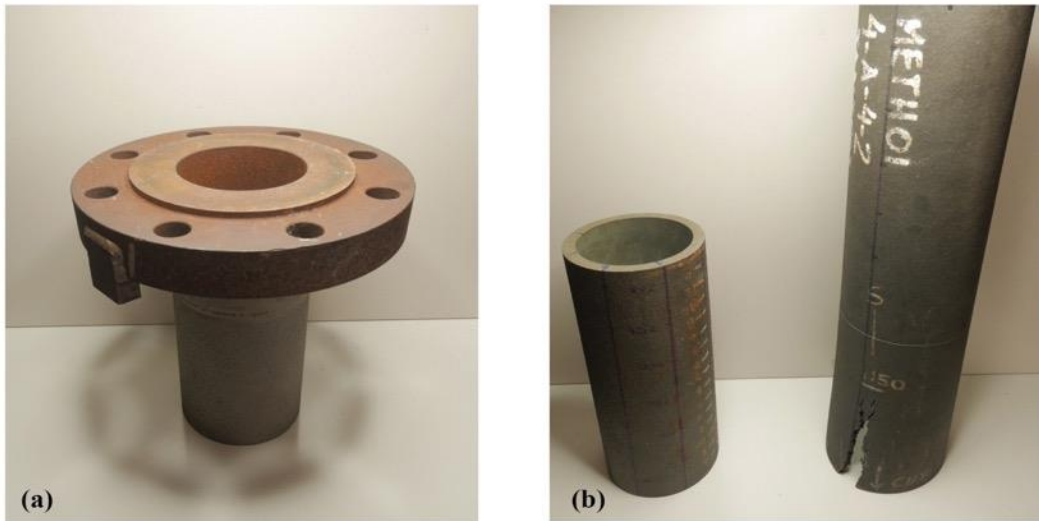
Sample Reformer Tubes Used for Testing RTIS Prototype Design a) Sample A, b) Sample B(left), Sample C (right)
